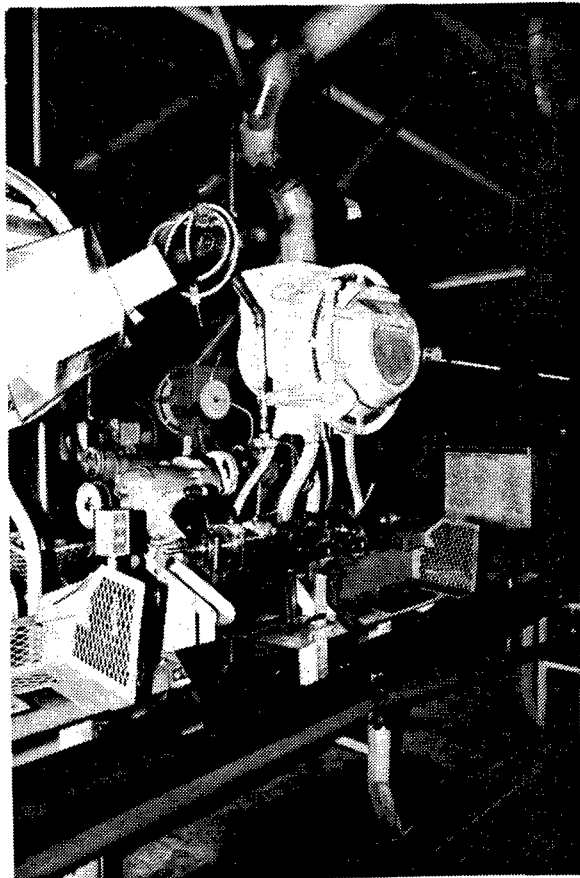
Building 102: Bullet Trim Machine manufactured in 1952 by the Fidelity Machine Company, Incorporated.
